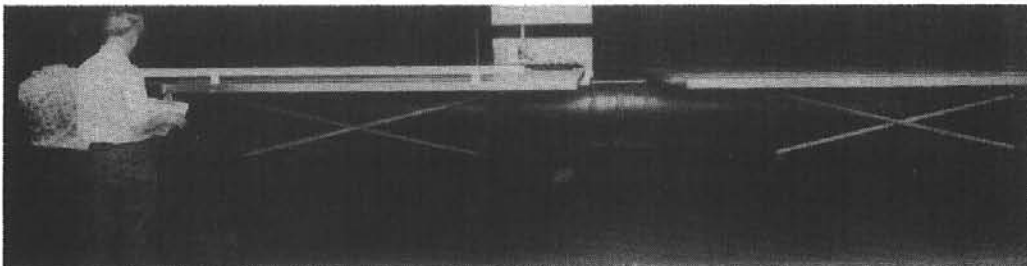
Assembly of MDAC Elevation Tube, Crossbeams, and Mirror Modules in CRTF Assembly Building
